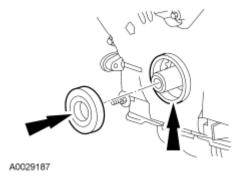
Removing Crankshaft Front Seal Using Special Tool Courtesy of FORD MOTOR CO.
